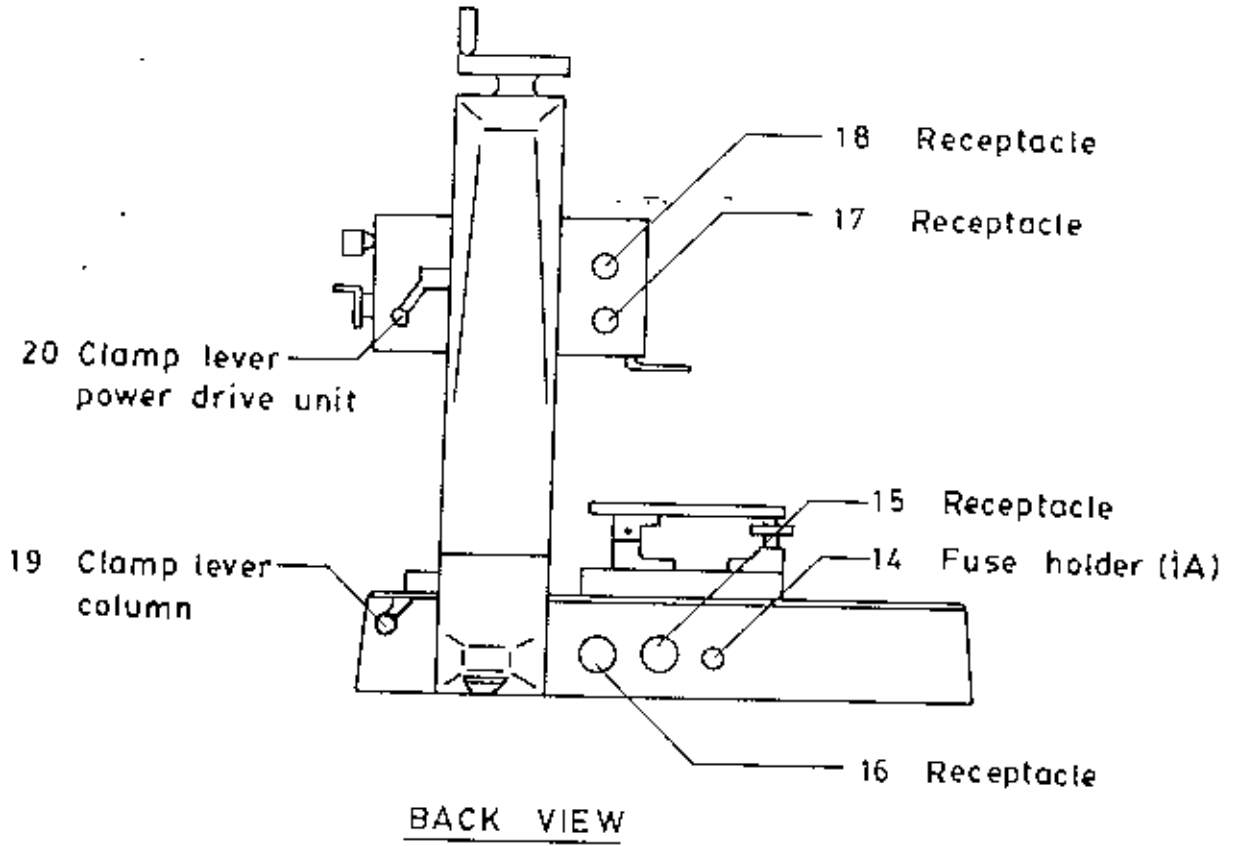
Surface roughness measuring equipment (surf. test AB-5 machine)
